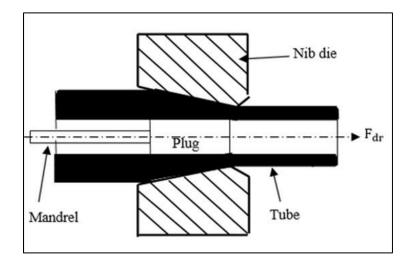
Tube drawing over a stationary mandrel (drawing with a fixed plug)
